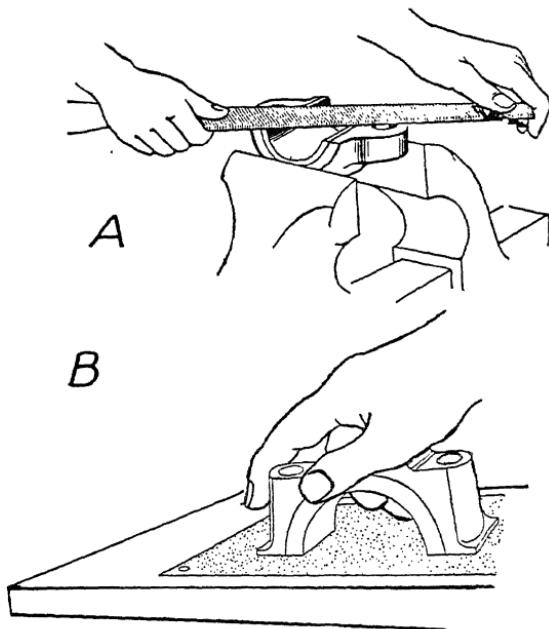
A—Draw Filing a Connecting-Rod Cap or Main Bearing Cap
